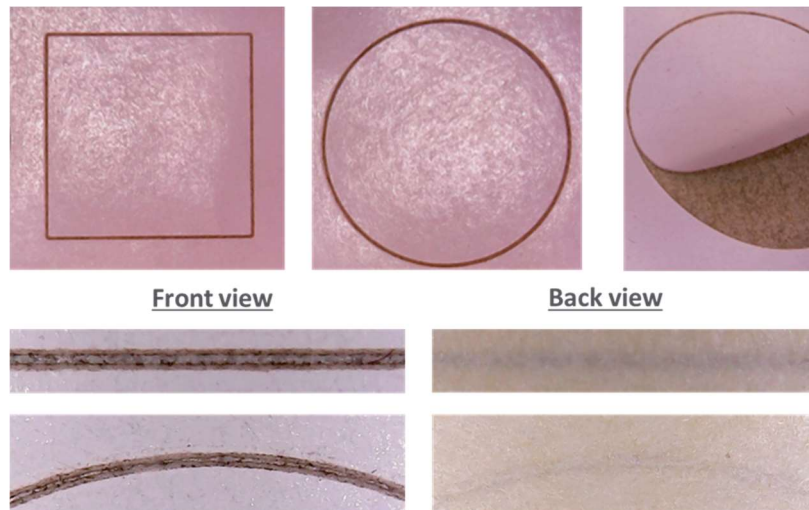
Kiss-cutting on double-layer paper with ScanPack shows thorough cutting on the top layer without damaging the bottom layer
